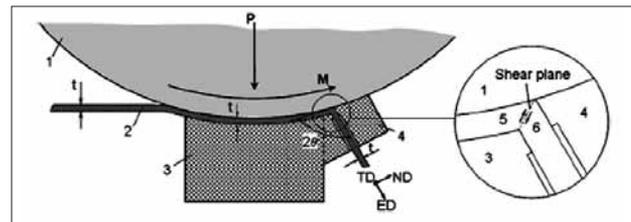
Scheme of the CFAE setup [11]: 1-driving roll; 2- sheet workpiece; 3- workpiece support block; 4 - die assembly, where 2θ is the extrusion angle; 5- first extrusion channel; 6- second extrusion channel. (ED is the extrusion direction; ND is the normal to the sheet; TD is the transverse direction.)
